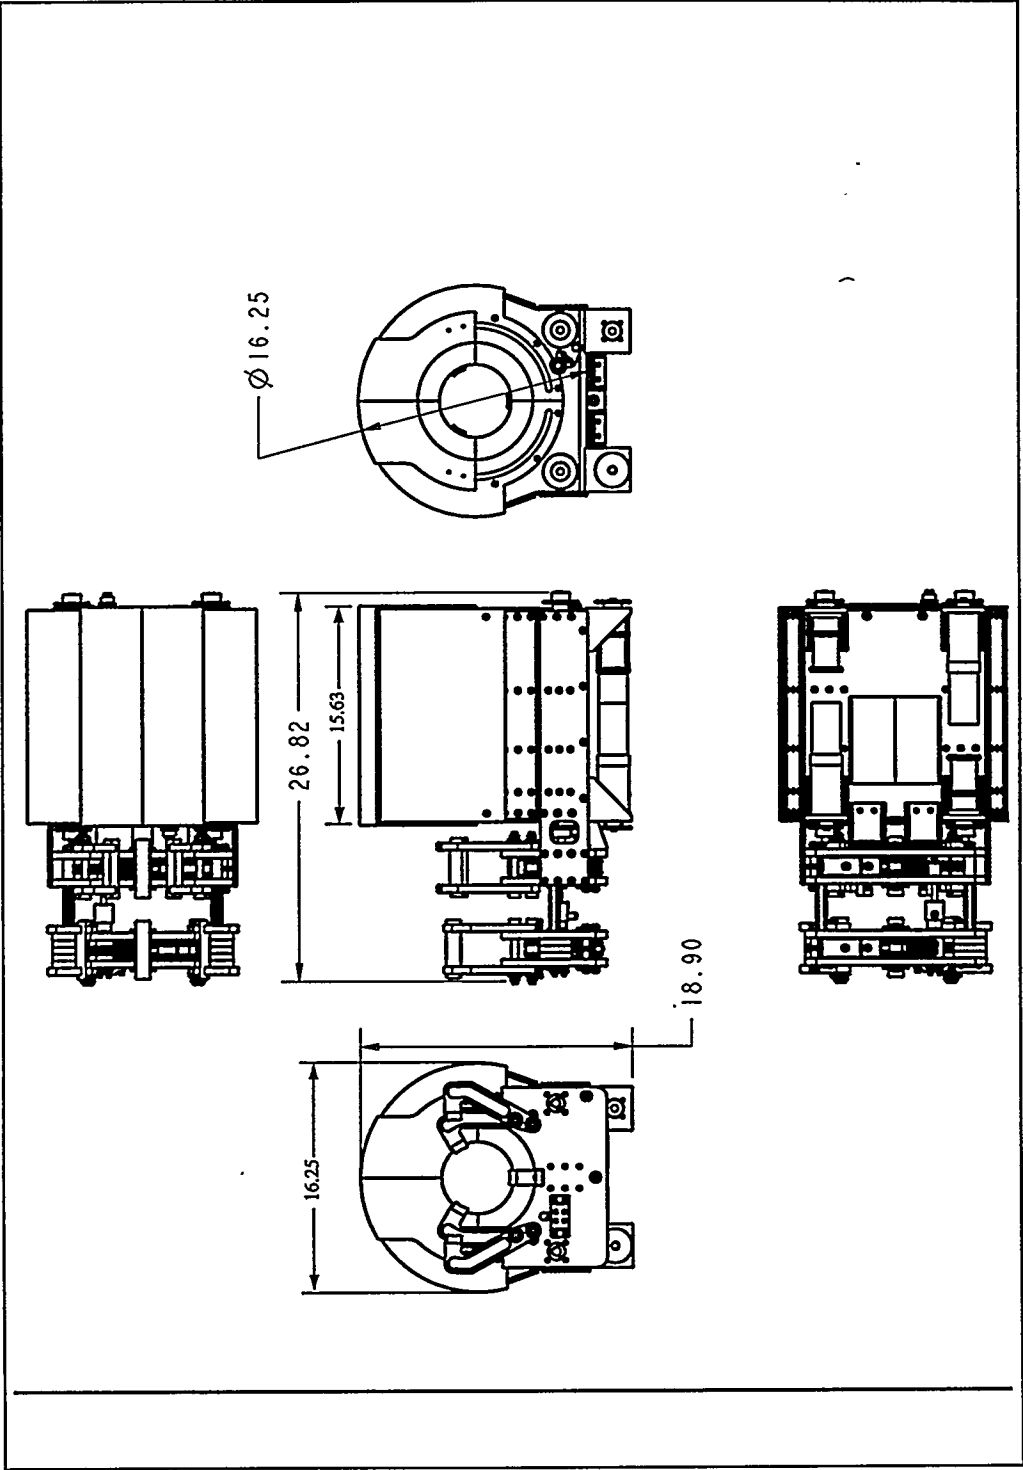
Dimensional views of the BOA robot pipe crawler (dimensions in inches)
